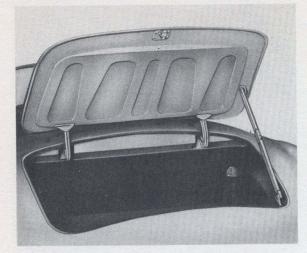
Deck Cover Assembly and Attaching Parts. NOTE: IDENTIFICATION OF PARTS ARE LISTED UNDER FIGURE 11 AND 9.
